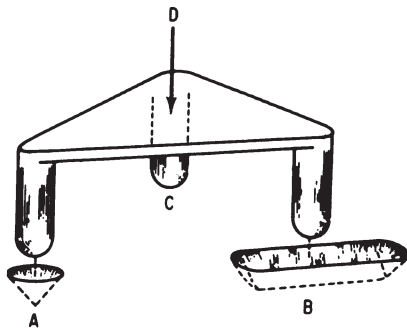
An example of a kinematic locating fixture. The three ball-ended legs of the stool rest in a conical hole at A , a V -groove (aligned with A) at B , and on a flat surface at C .
